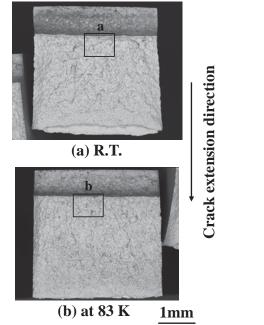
Schematic showing typical fracture appearance of the extruded AZ61 magnesium alloy tested at room temperature, (a) and 83 K ,(b)
